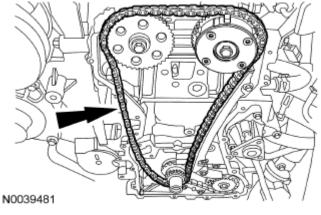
Locating RH Timing Chain Guide Courtesy of FORD MOTOR CO.
